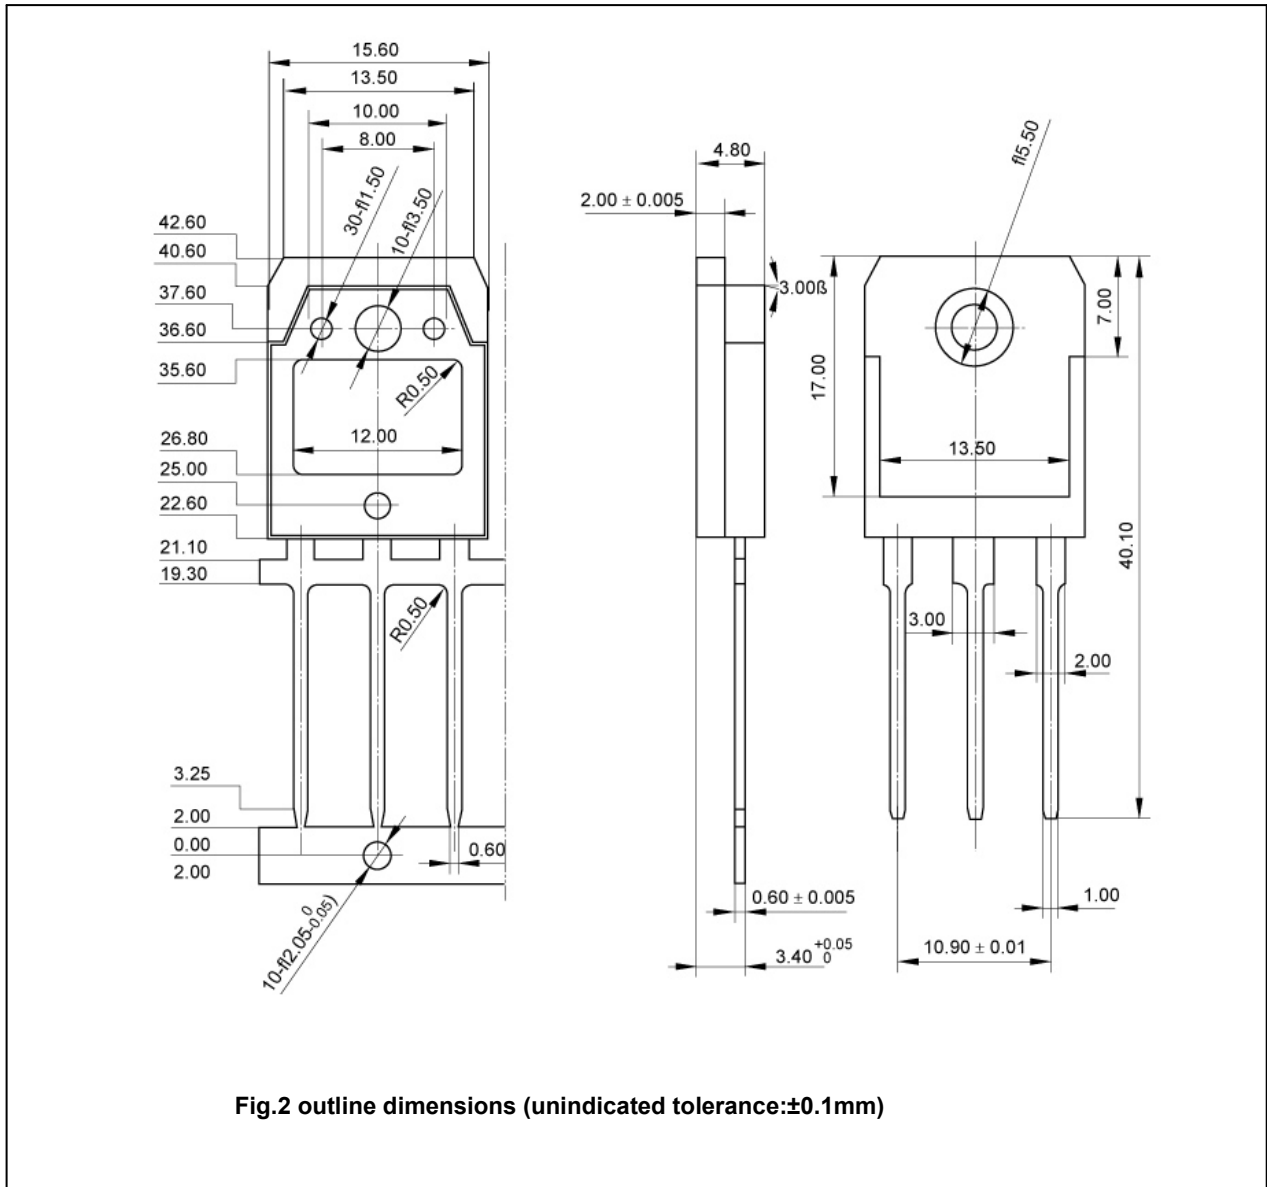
outline dimensions (unindicated tolerance: ± 0.1 mm)
